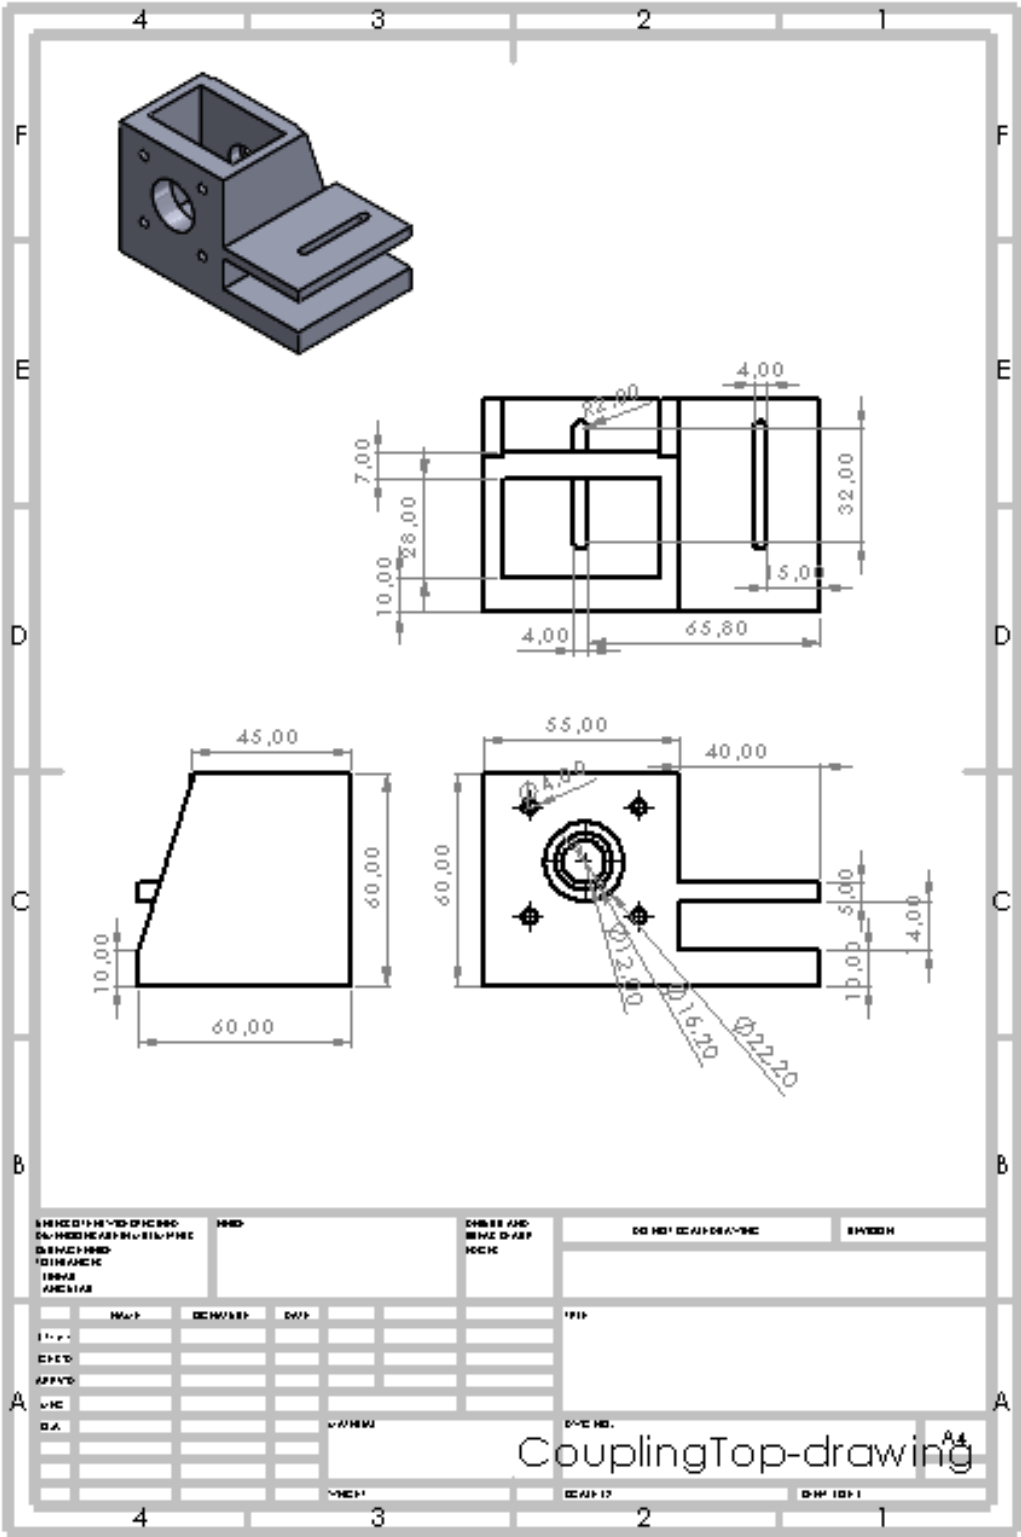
Technical drawing of the top coupling part of the hydrodynamic test-setup.
